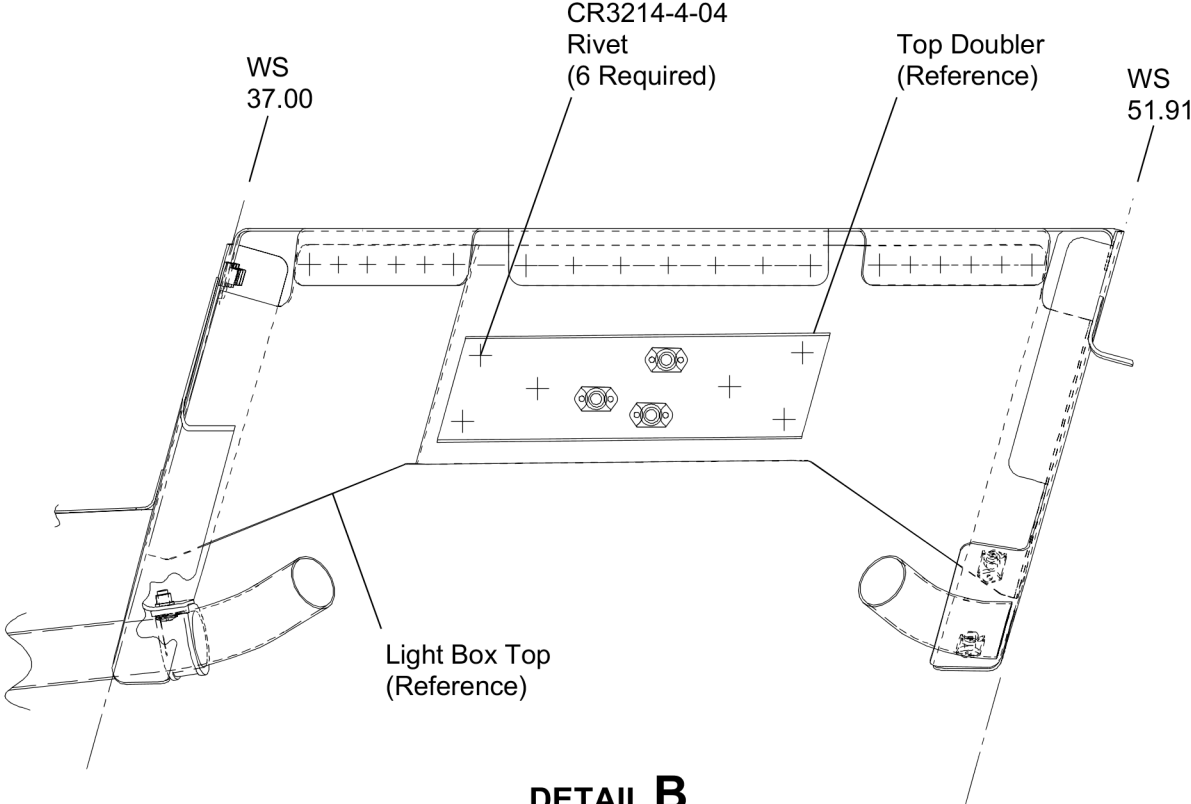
Sealing Between Piccolo Tubes And Light Box Fasteners (Sheet 2)
